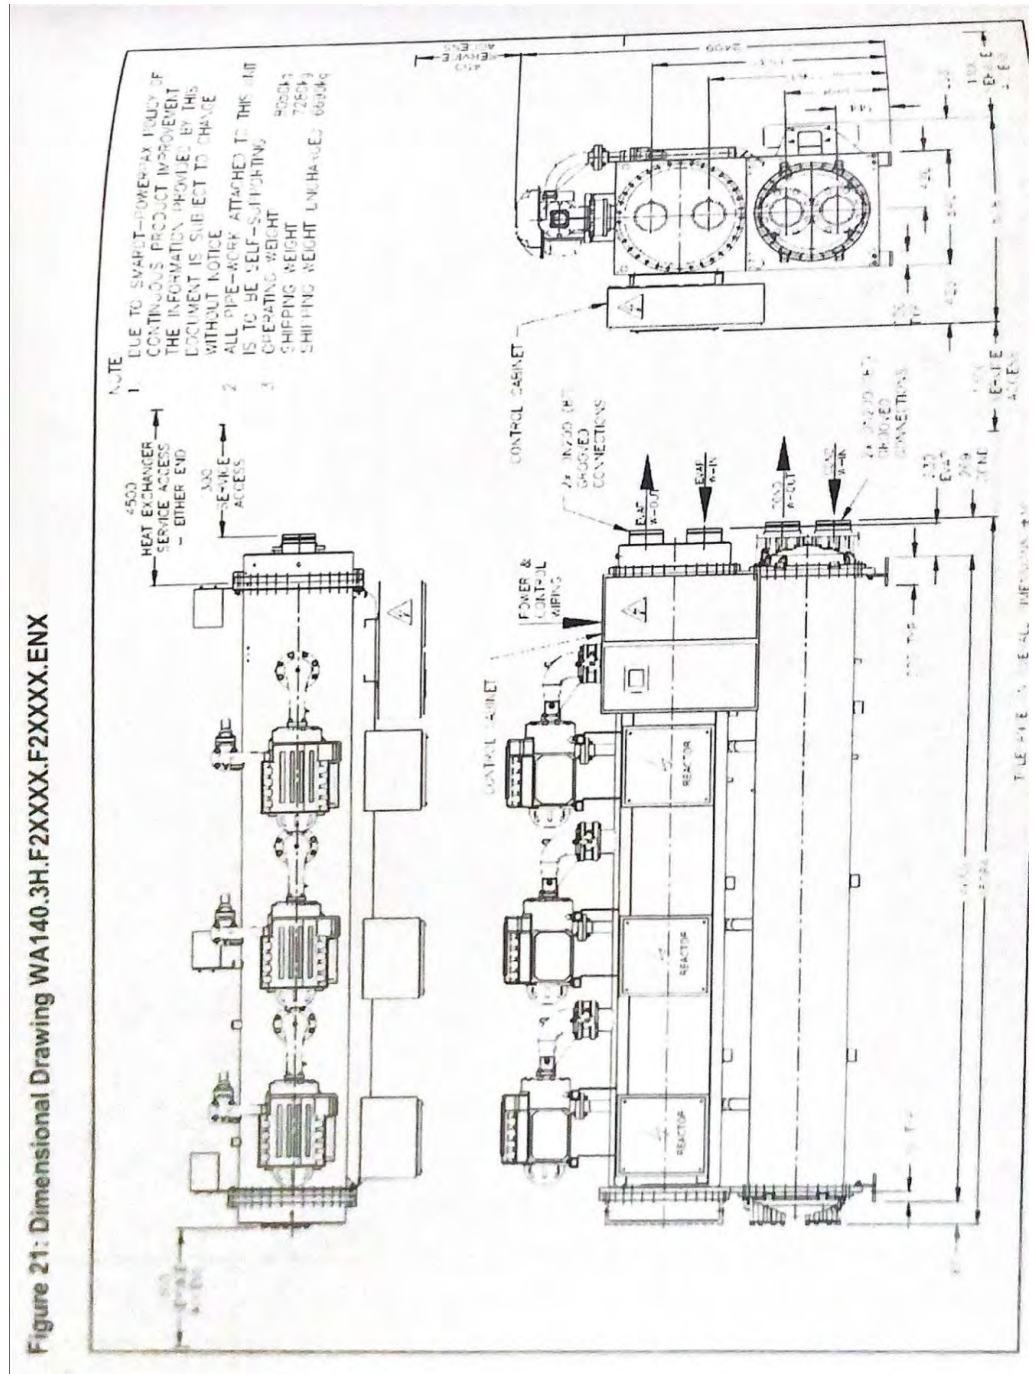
Dimensional Drawing WA140.3H.F2XXXX.F2XXXX.ENX
